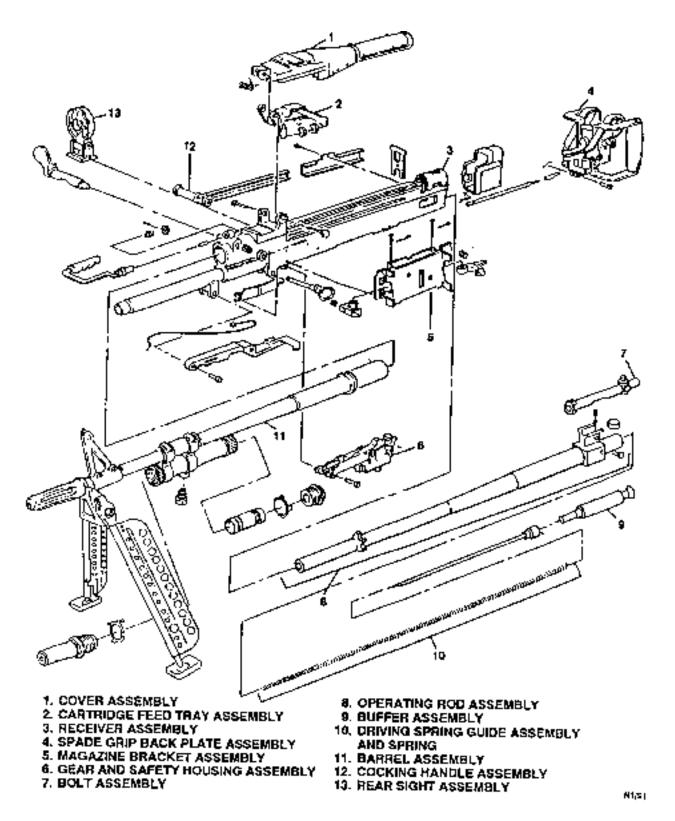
(NON-ET) M-60-D Machinegun, 7.62 Millimeter (Sheet 1 of 2)
